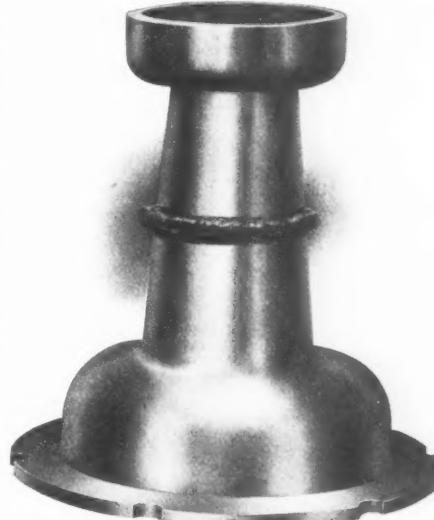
Electric Weld on Automobile Pinion Casing.
